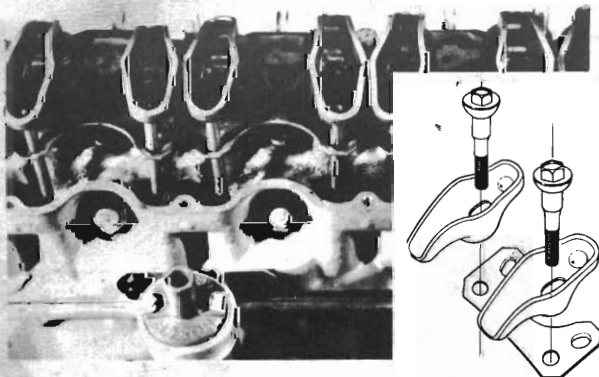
Valve rocker arms, pushrods and pushrod guide plates (insert shows dis-assembled view)
